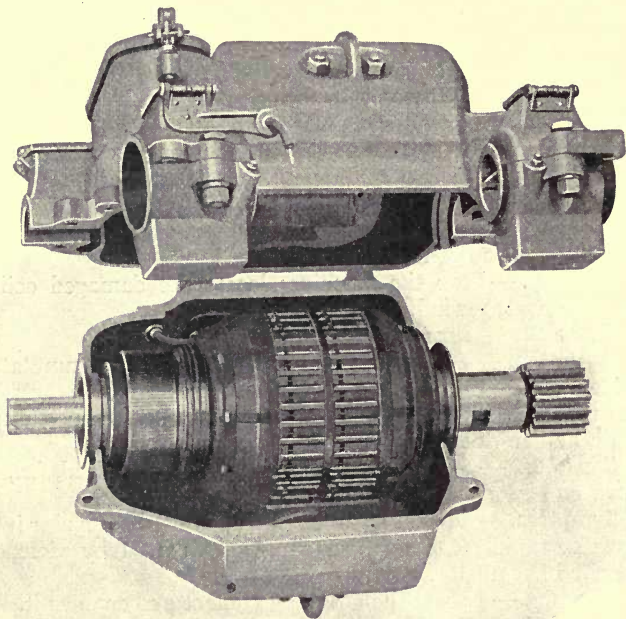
General Electric Motor — Lower Frame Dropped.
